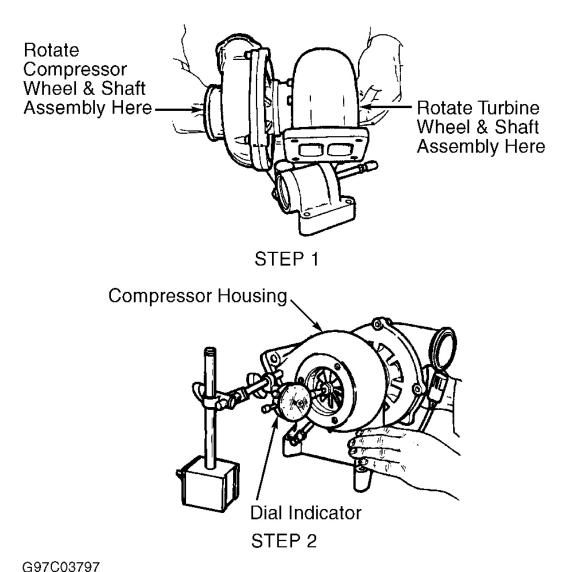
Checking Turbocharger Courtesy of FORD MOTOR CO.
